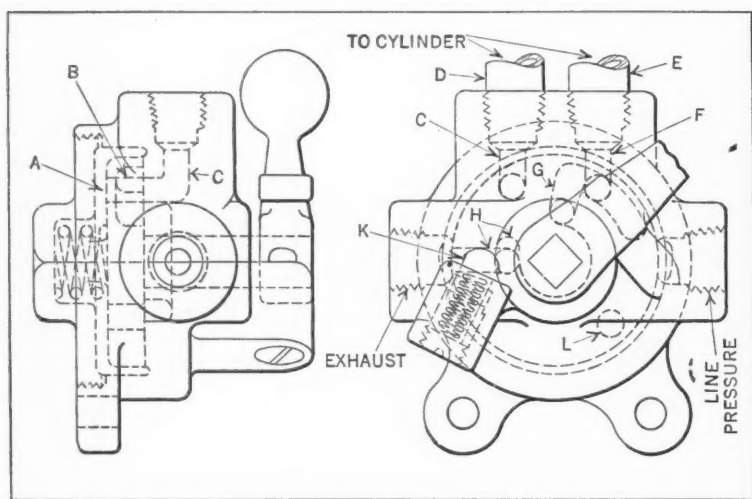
Pneumatic Valve by Means of which the Same Air is Used for Opening and Closing a Chuck
